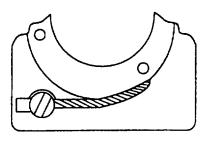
Threaded Coupling and Assembly Nut Safety Cable Installation Detail
